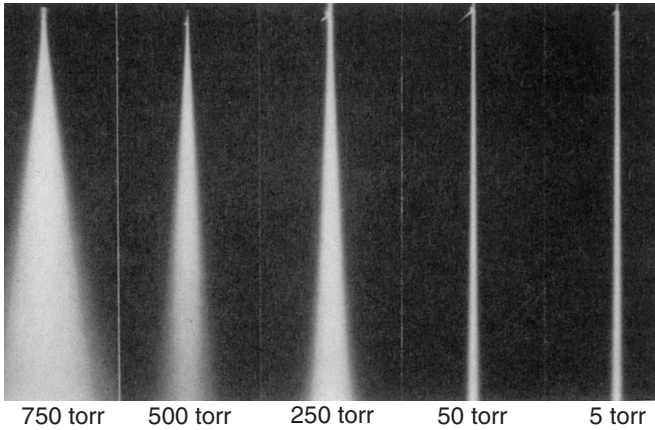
Dispersion of electron beam at various ambient pressures (1). Reprinted from *Welding Handbook* (1). Courtesy of American Welding Society.
